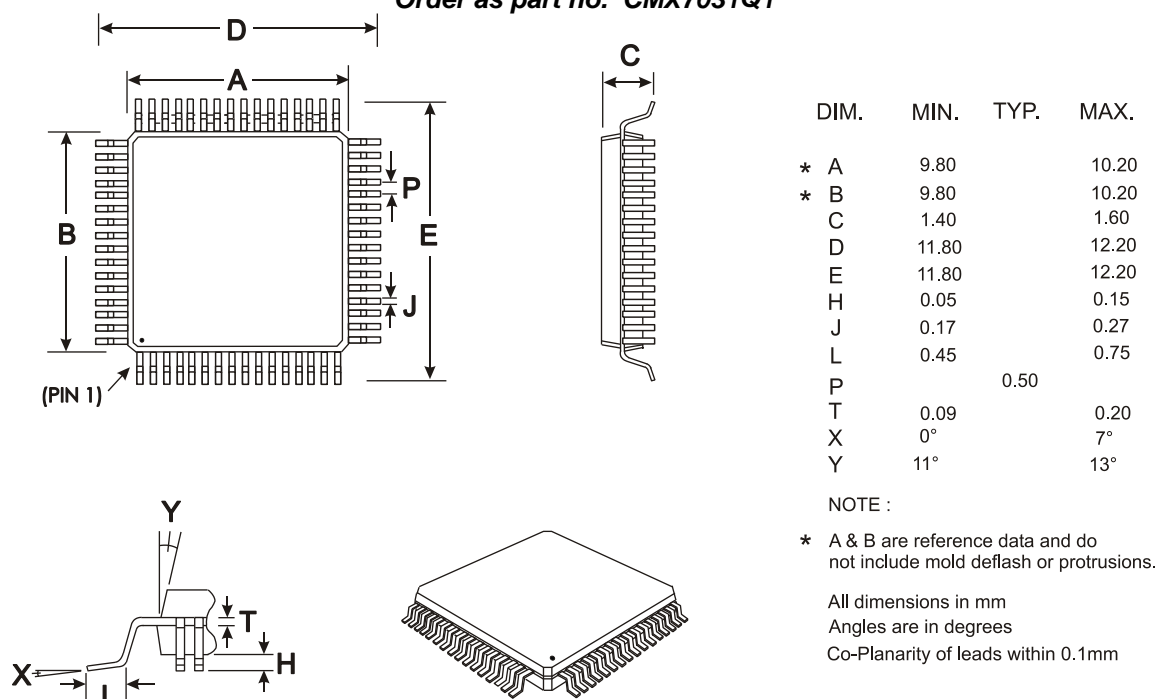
Mechanical Outline of 64-pin LQFP (L9)
